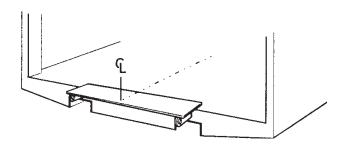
Bolt or spot-weld the mounting jig to the rear beam part. no. 60536 for Z 10-135
